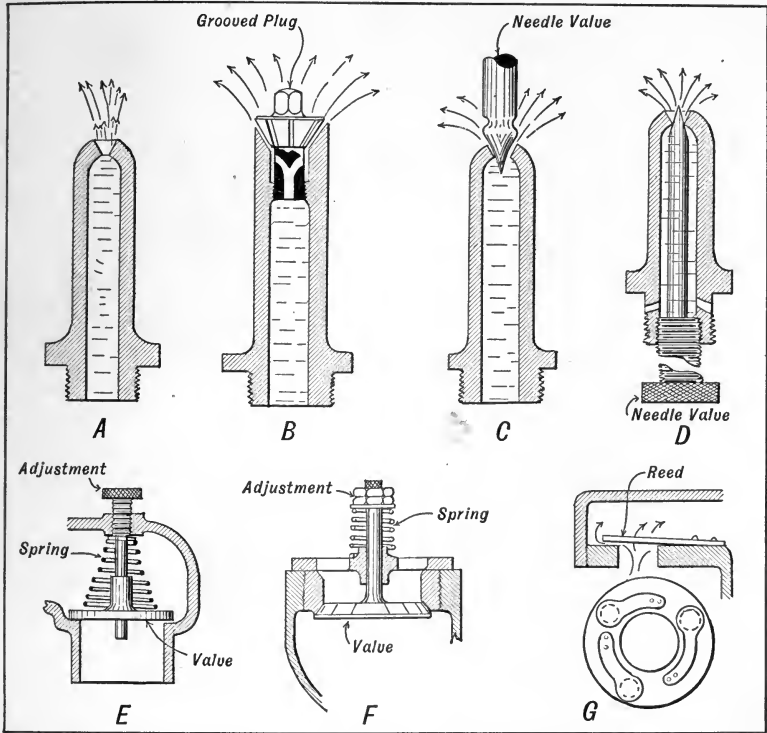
Spray Nozzle Forms and Methods of Supplying Auxiliary Air to Modern Carburetors.
